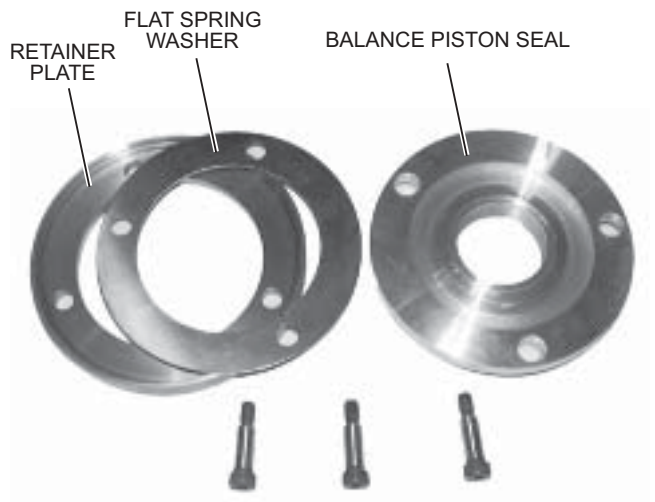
HF BALANCE PISTON SEAL ASSEMBLY
